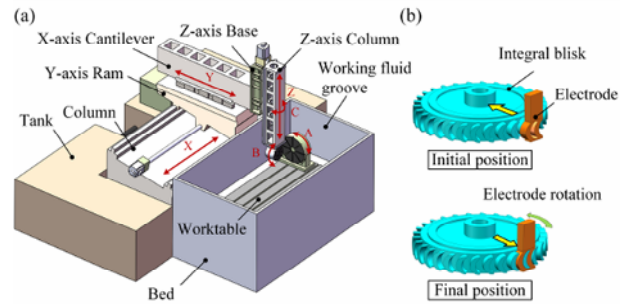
The model of the EDM machine tool; (a) The simplified geometry model of the large EDM machine tool; (b) the erosion path of the electrode.
